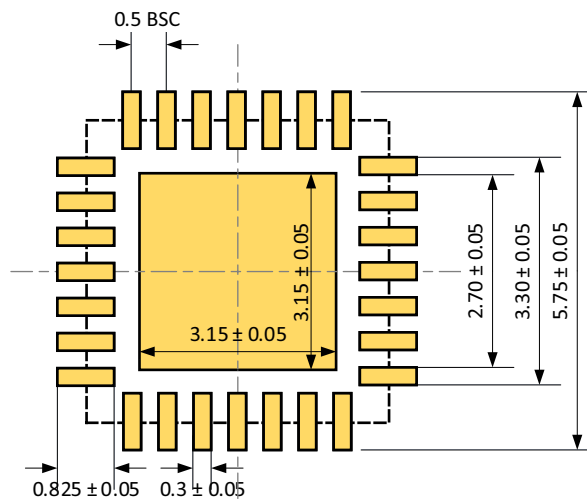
Recommended board layout for QFN 28-pin 5x5mm (all dimension in mm)
